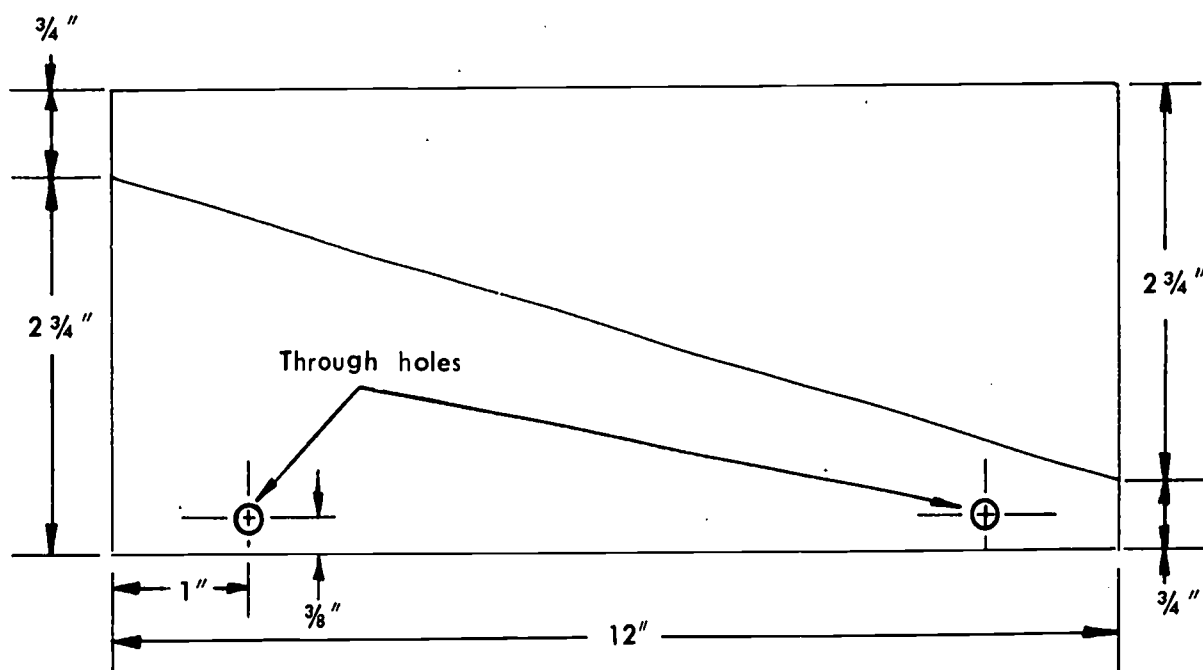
Pattern for Cutting Test Vehicle Bodies
